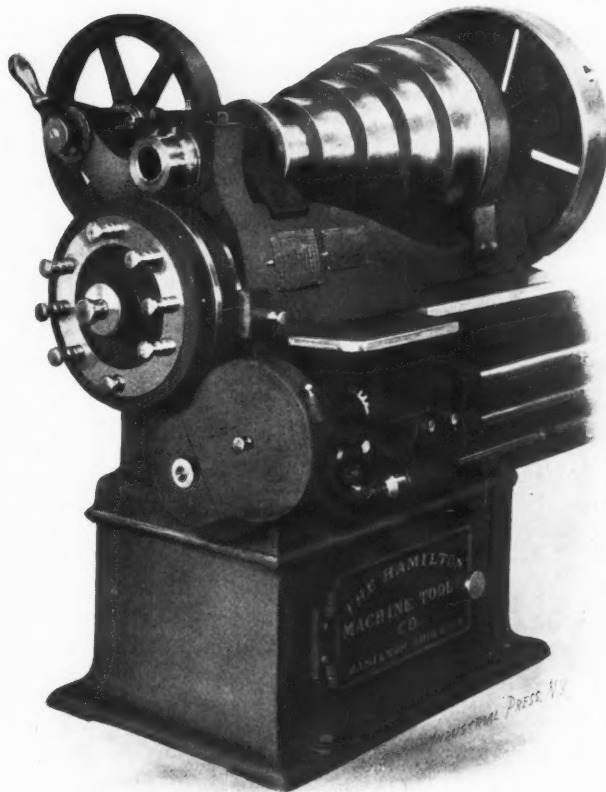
Screw-cutting Arrangement of "Hamilton" Lathes.
